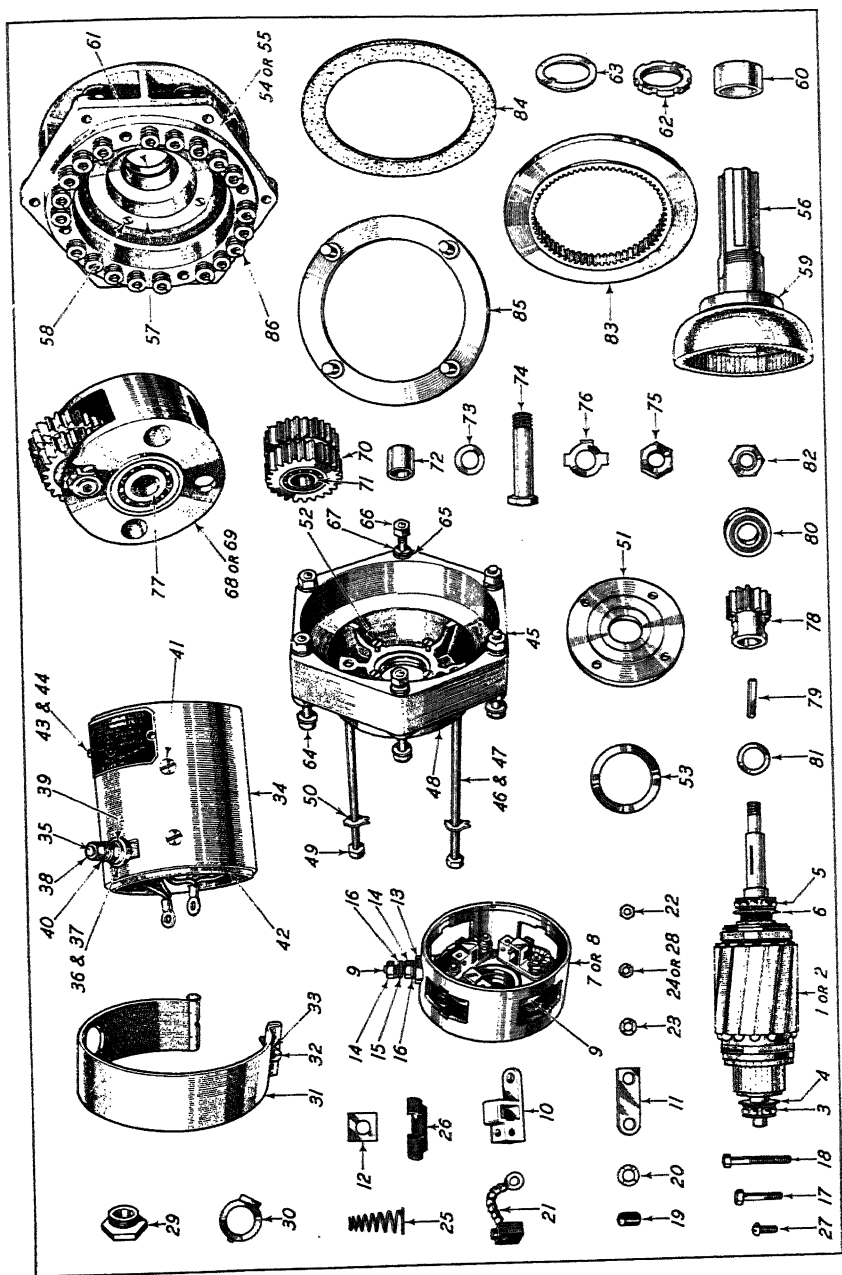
EXPLODED VIEW OF B.T.H. STARTER TYPE CA 3750. FORM 1FF2
